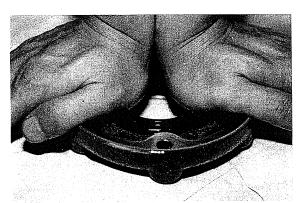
Reassembly of Floating Seat (Seal Carbon)
